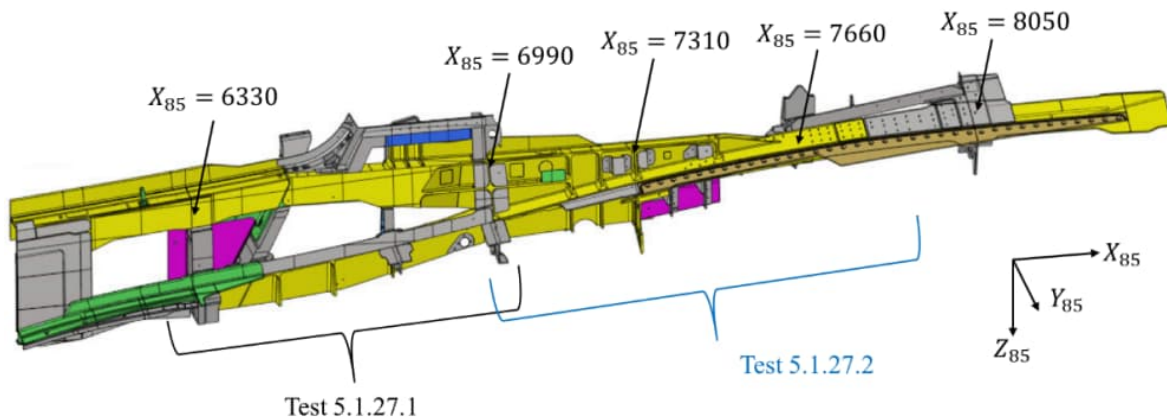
Outboard overview of the Gripen F airframe structure in the canopy sill-to-stringer joint area with the outer skin removed.
